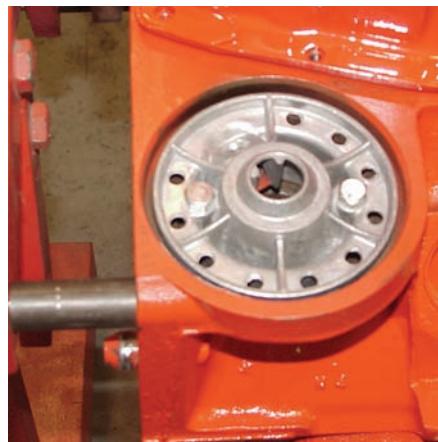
The valve assembly, P/N 18-43, between the engine block and the oil filter element allows oil to bypass the oil filter if the filter ever becomes completely blocked. This helps prevent engine failure on cars with lots of sludge build-up.
